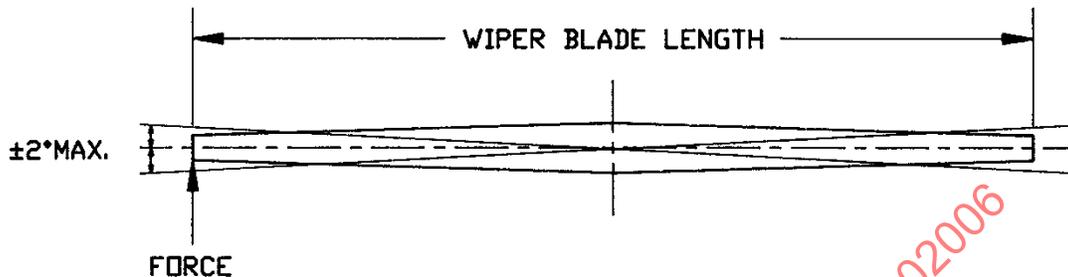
Lateral angular movement - wiper blade to wiper arm
